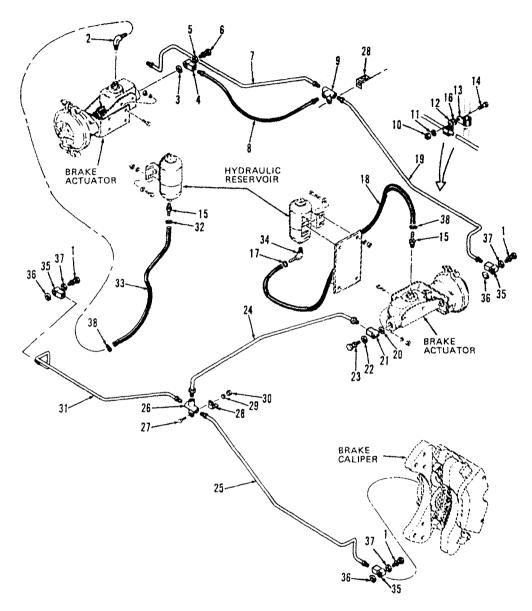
Hydraulic brake system hoses, lines, and fittings.
